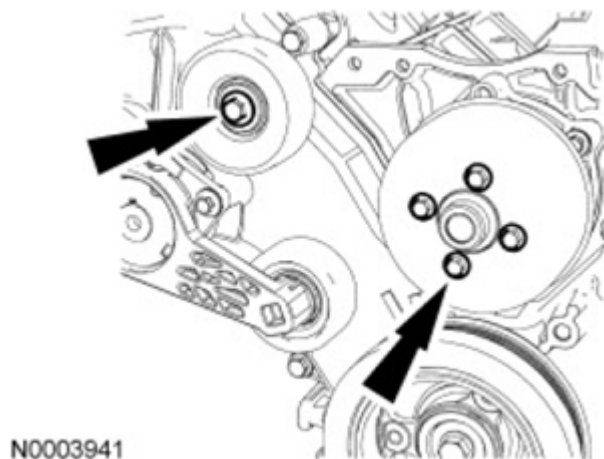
Locating Coolant Pump Pulley And Idler Pulley Bolts
